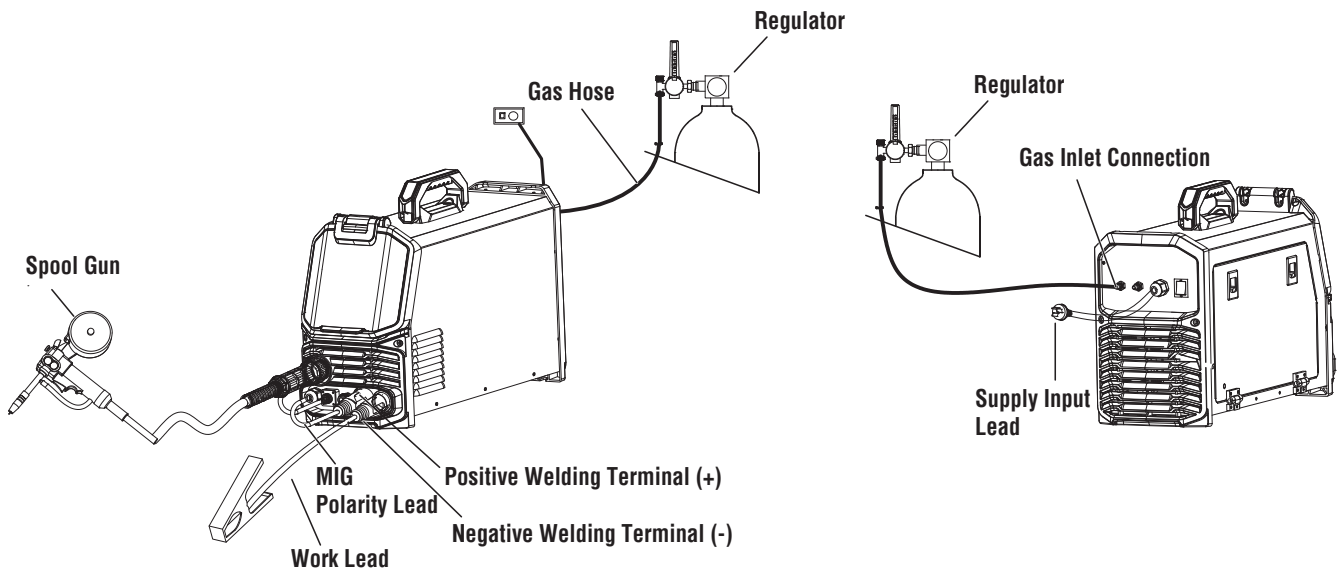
Setup with Spool Gun for Gas Shielded MIG Wire
